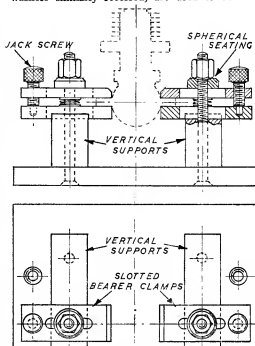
Details of simple "universal" test stand for miniature i.c. engines. (Half-size)
